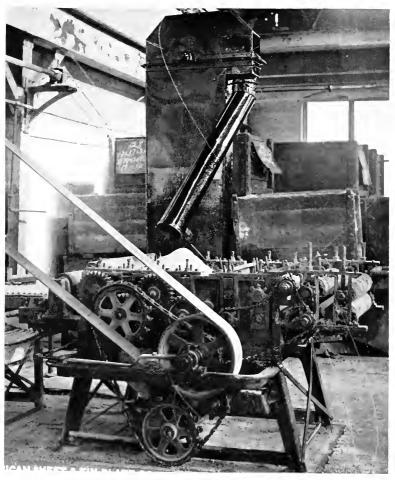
Fig. E. — Guerds off dusting machine. (Courtesy of An erican Sheet and Tin Plate Company.)
